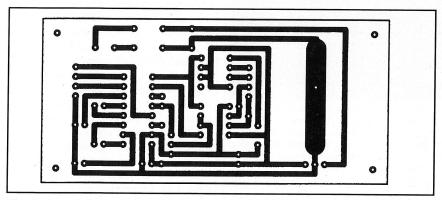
Actual-size etching-and-drilling guide to use for fabricating printed-circuit board.
